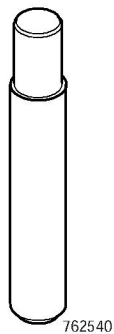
892/01152 Valve Stem Seals Fitting Tool
